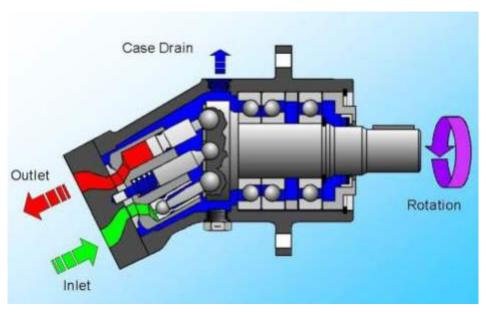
(k) Bent-axis Axial Piston Pump
